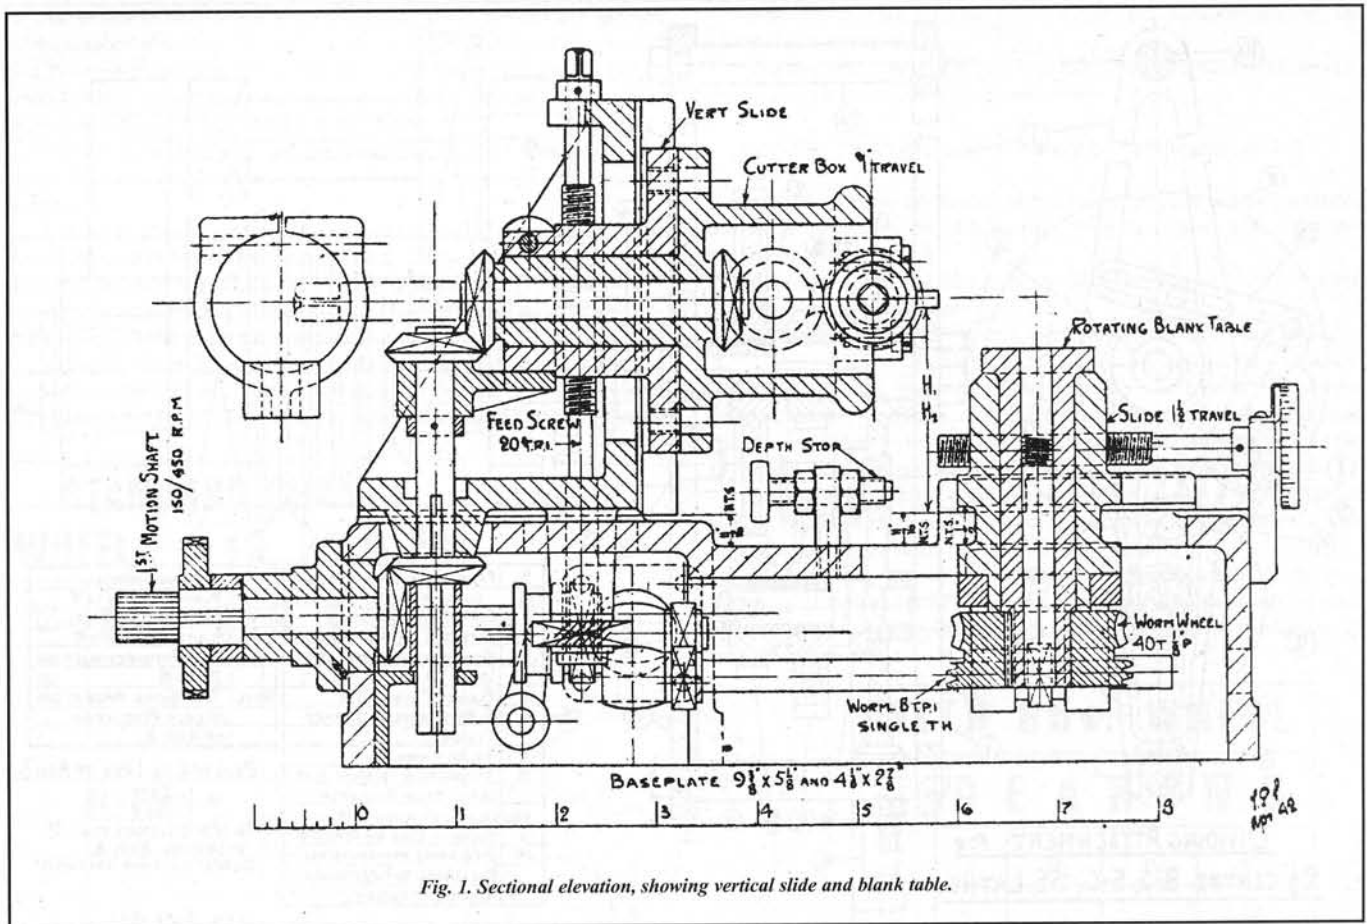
Sectional elevation, showing vertical slide and blank table.
